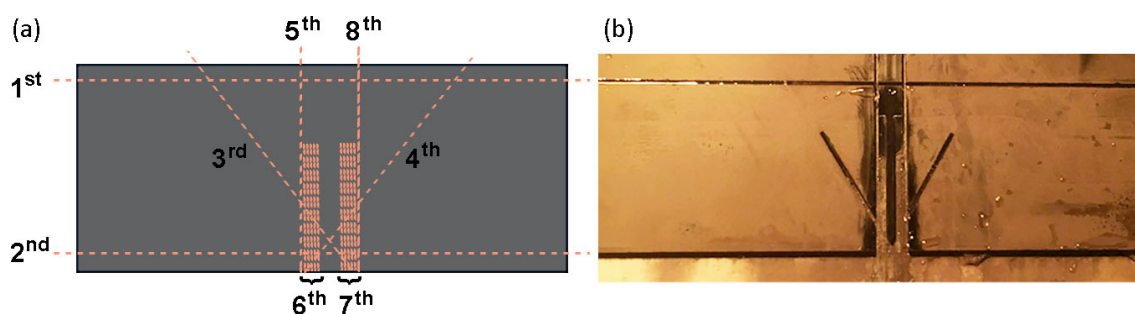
Dicing cuts sequence to produce shaft profile. (a) Schematic drawing. (b) Photo of the dicing result.
